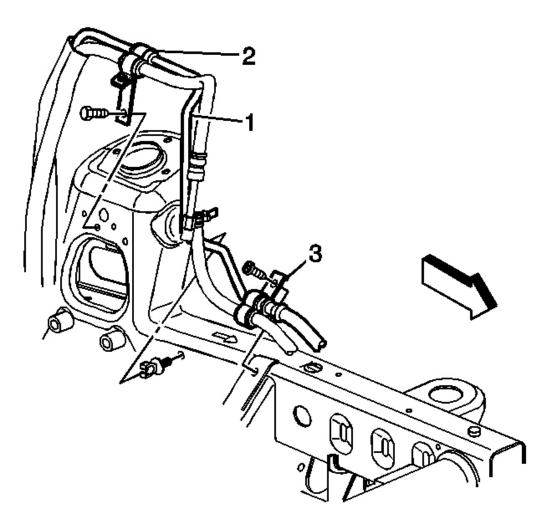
View Of Power Steering Hose Assembly, Front Bracket Mounting Bolt & Rear Bracket <u>Mounting Bolt</u> Courtesy of GENERAL MOTORS CORP.
